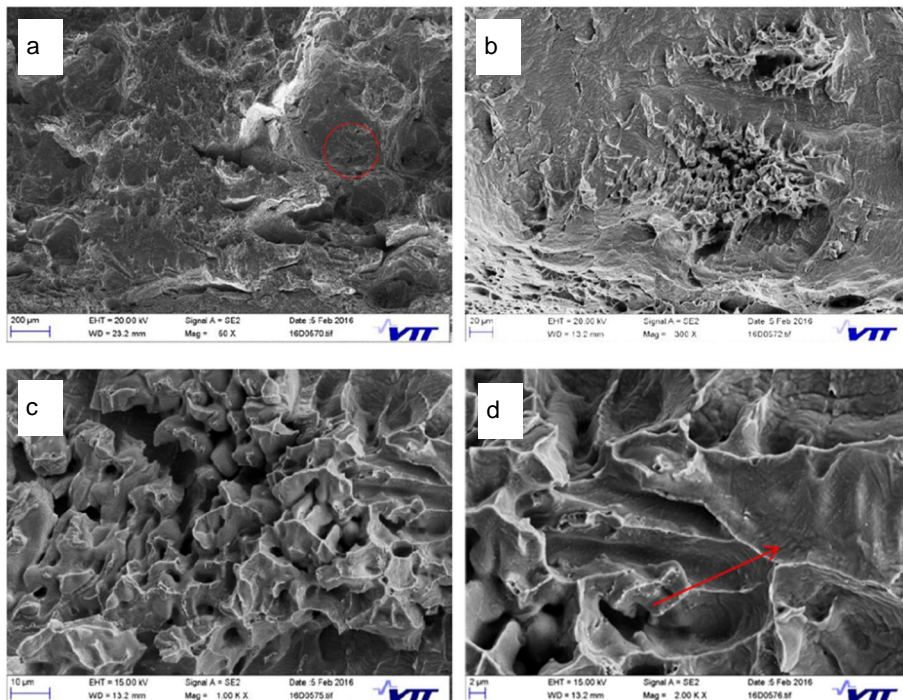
SEM images illustrating the appearance of the weld defects observed on the fracture surfaces of the ductile Charpy-V specimens. The location of a weld defect is circled in red in a. Details of the weld defect in different magnifications are presented in b-d. Some carbides are visible in d, highlighted with the red arrow.
